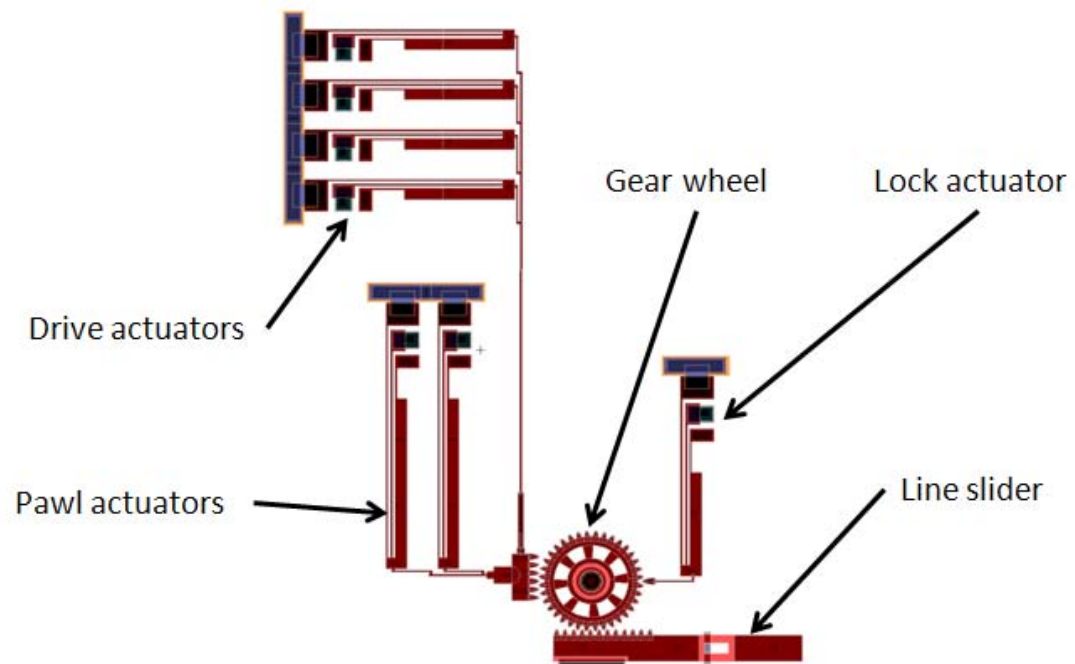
Design of the individual gear actuator assembly. In this design, the pawl and drive gears are connected so that no slipping between the two mechanisms occurs during actuation. In this setup, the drive gear is actuated first, rather than the pawl as in Figure 3-9; the actuation is still a very similar 4-step process as before.
